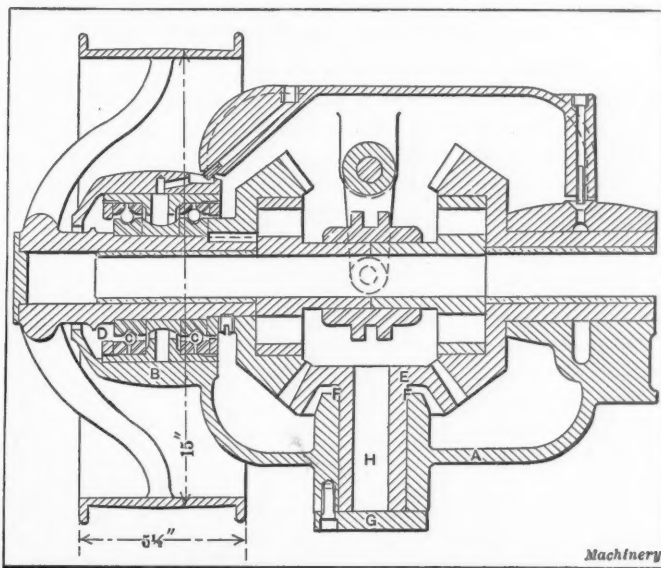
Reversing Mechanism of Reed-Prentice Lathe
